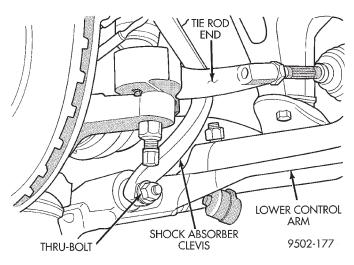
Shock Clevis To Lower Control Arm Bolts
